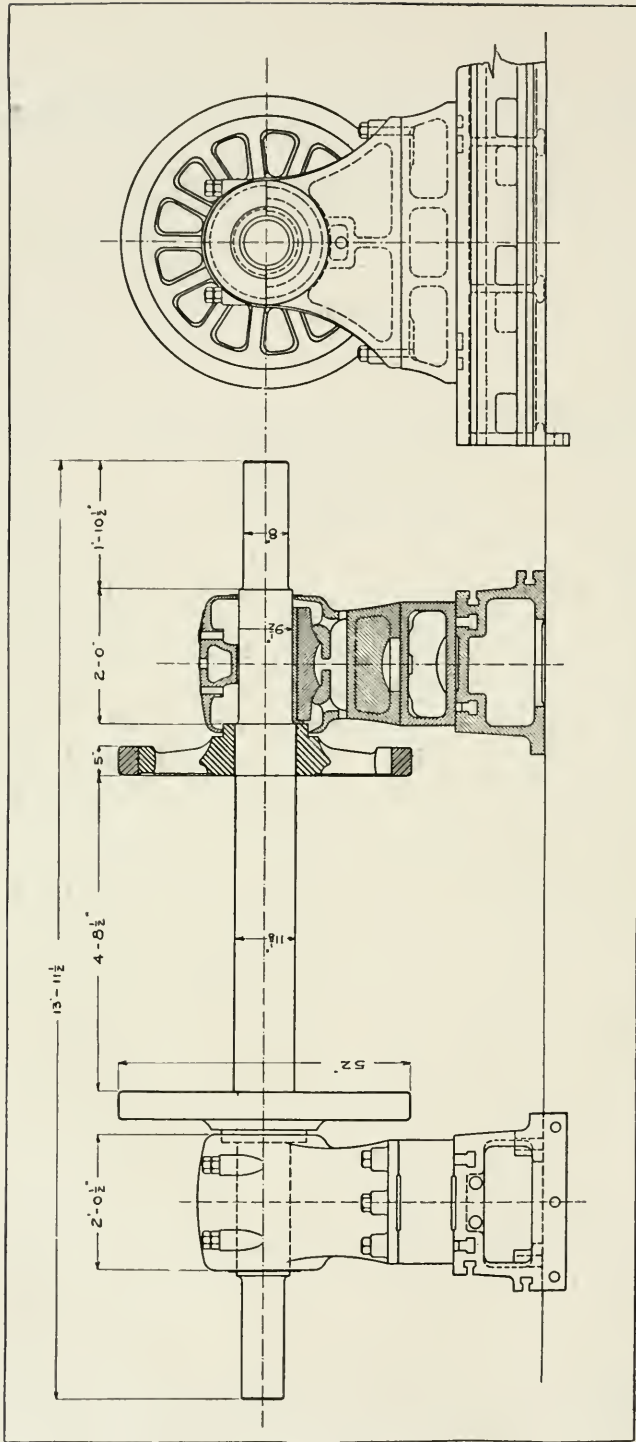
One Pair of Supporting Wheels, with Axle, Bearings and Bed Plates.
